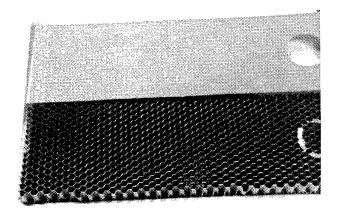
Failure surfaces resulting from peel testing of the Untreated honeycomb and AF130-2 adhesive conditioned 30 days at 70°C/100%R.H., indicating fillet bond pull-out.
